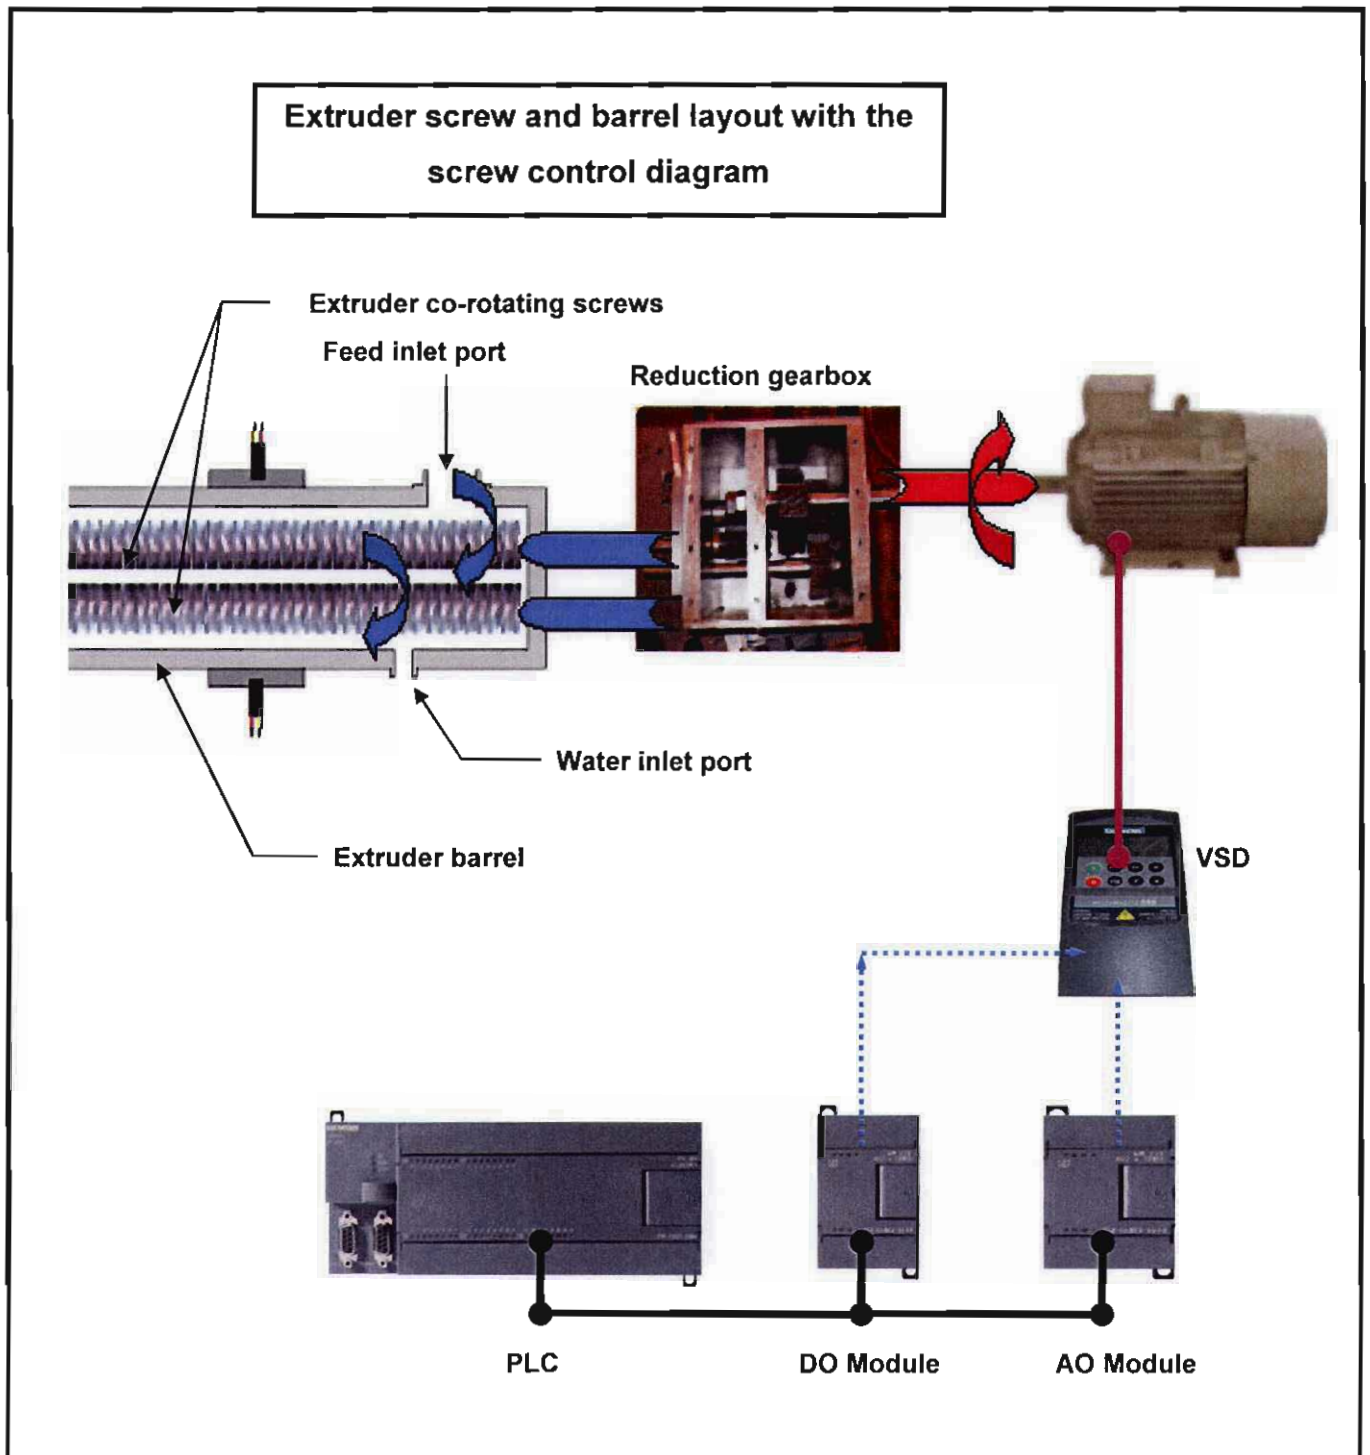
Extruder screw and barrel layout with the screw control diagram.
